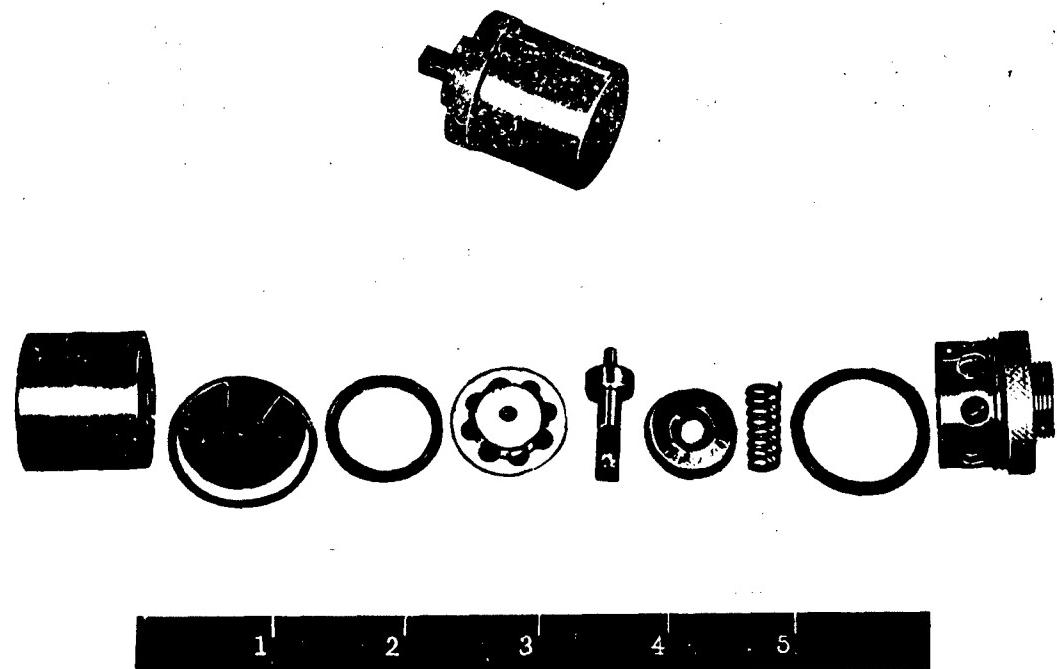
Assembled and exploded view of Electrolytic Arming Disk.
